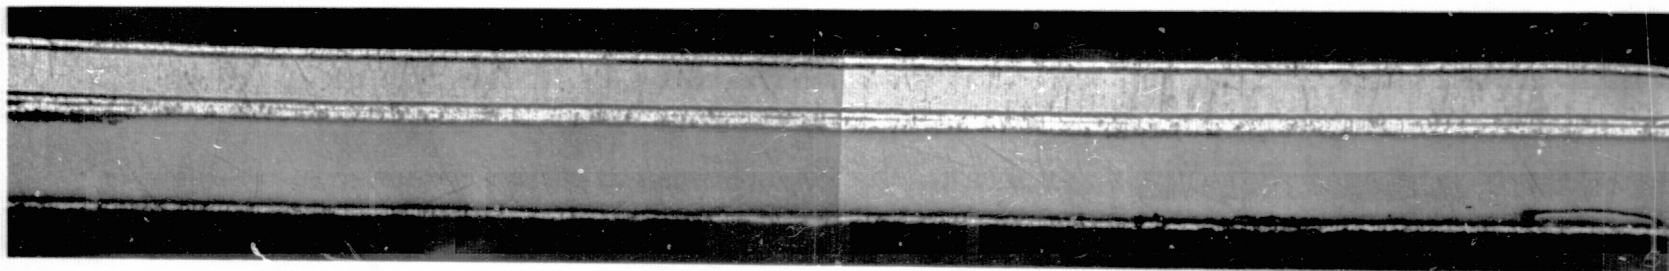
Joint No. 45A, Cross Section of Cell Front Contact Weld
